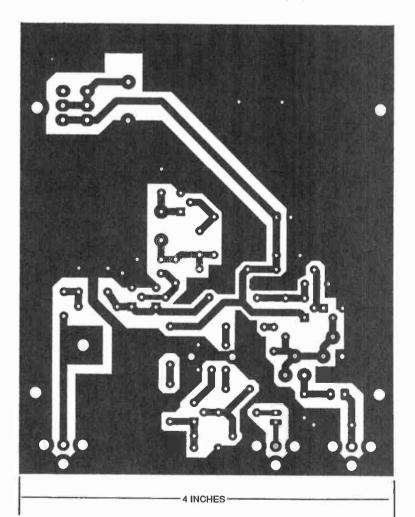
If you wish, you can use this foil pattern to make your own PC board for the TV Transmitter.
